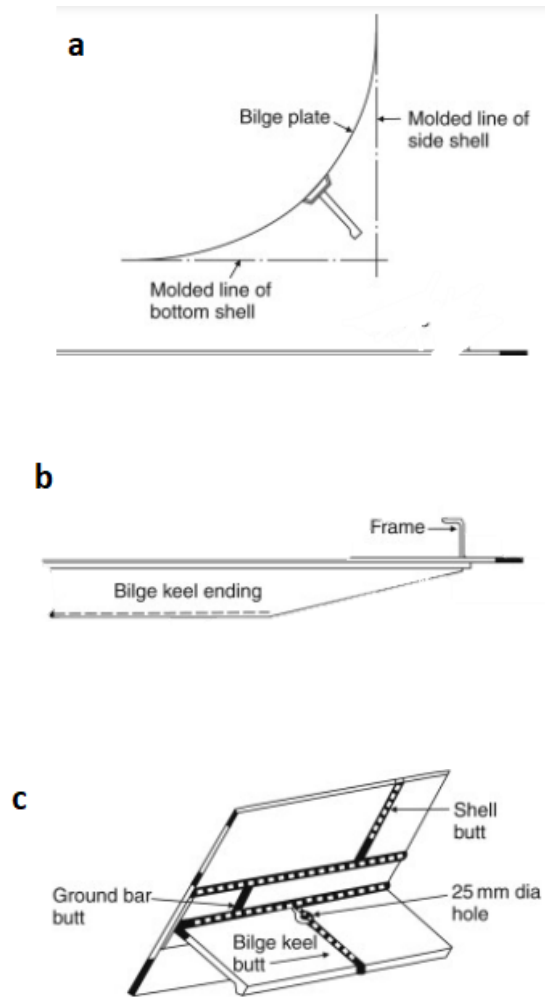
Construction of bilge keel [12]. a) Front view. b) Side view. c) Perspective view.
